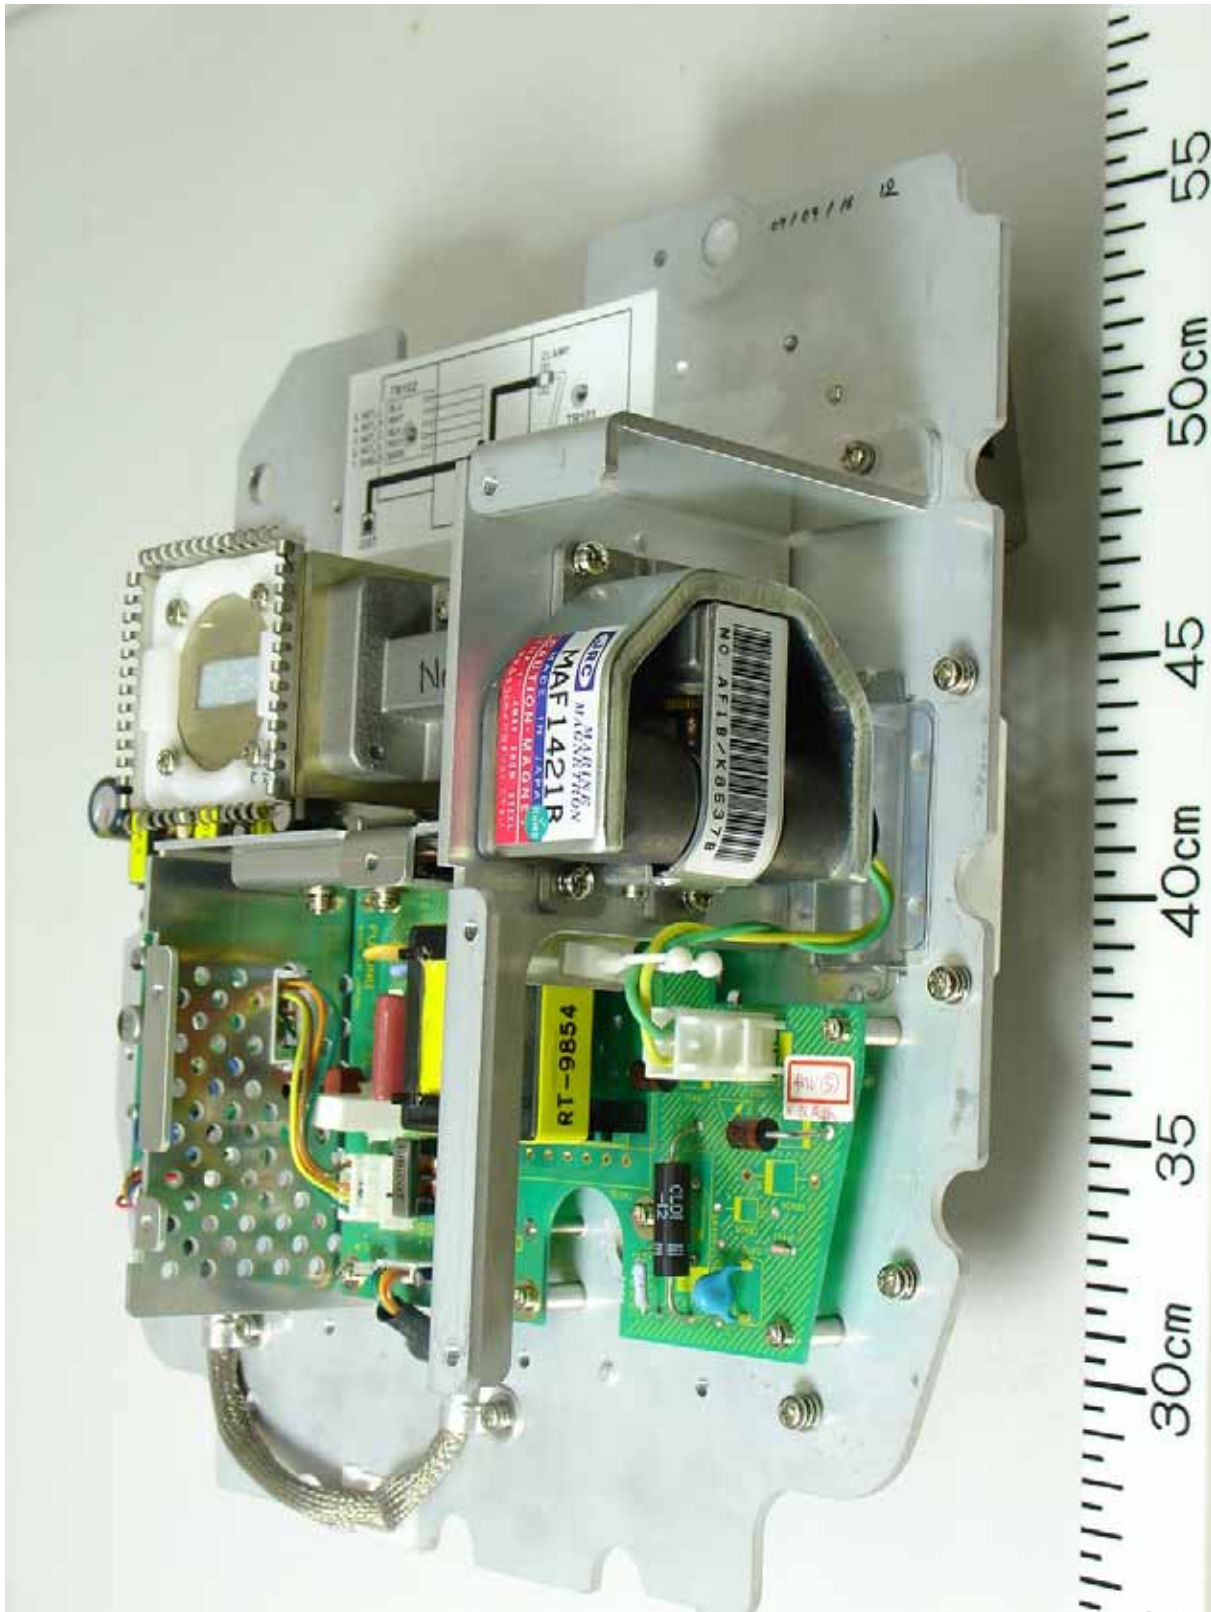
Transceiver module Top View (with Shield-cover removed, showing MD Board 03P9450A (left) and Magnetron (right))
